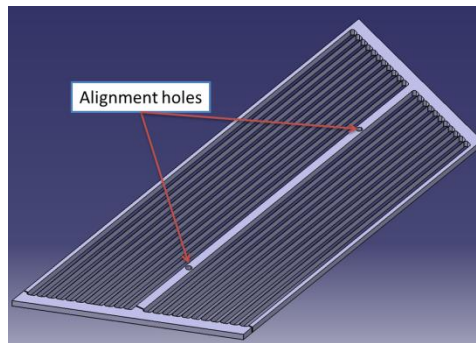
Isometric view of the central grid. The alignment holes are highlighted.
